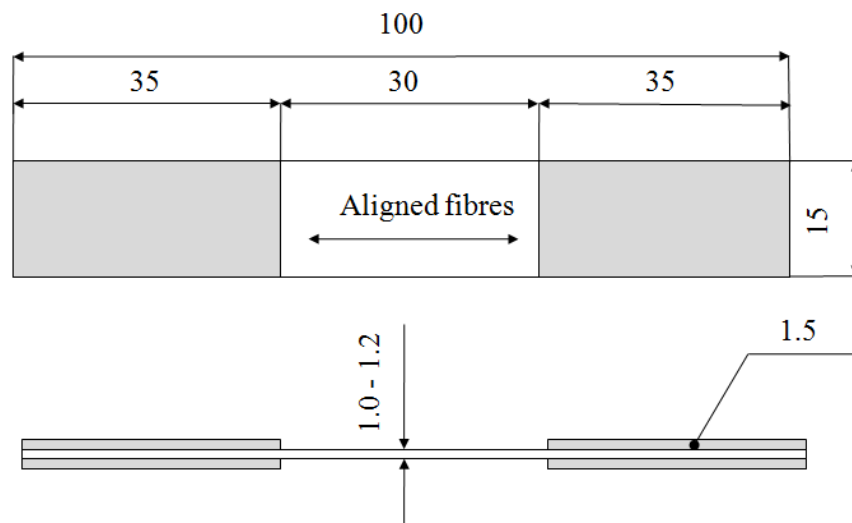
Dimensions of tensile test specimens in mm. Aluminium end tabs. (modified after Gomes *et al.*, 2007).
